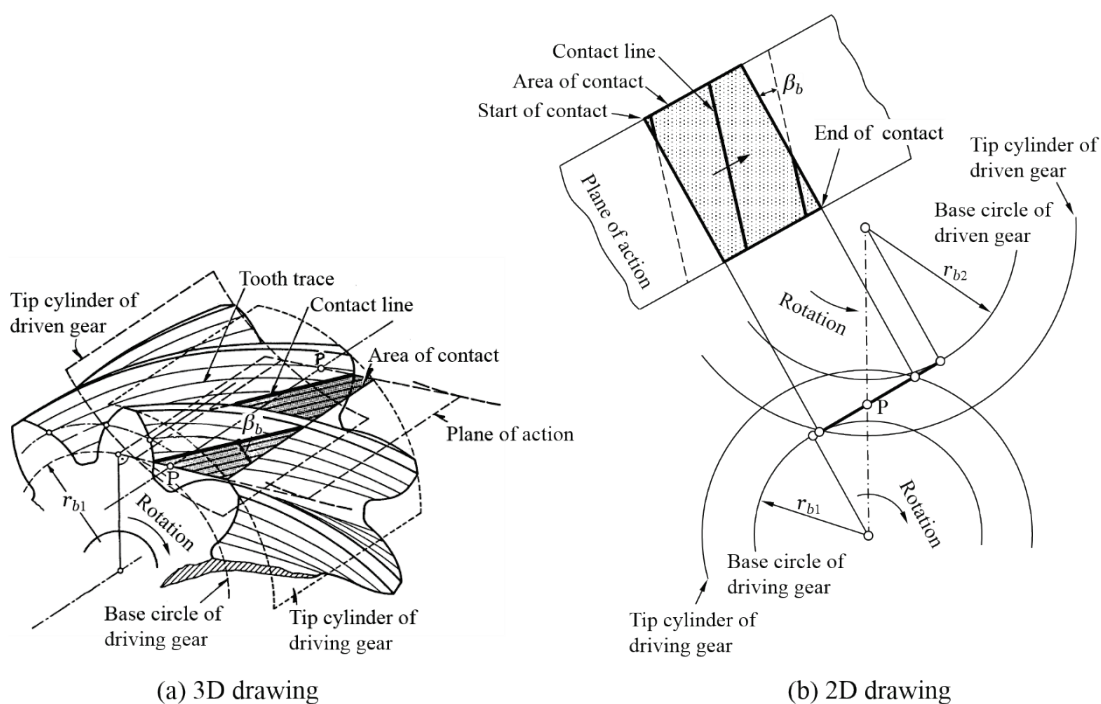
Engagement of helical gears ^{[2][55]}
